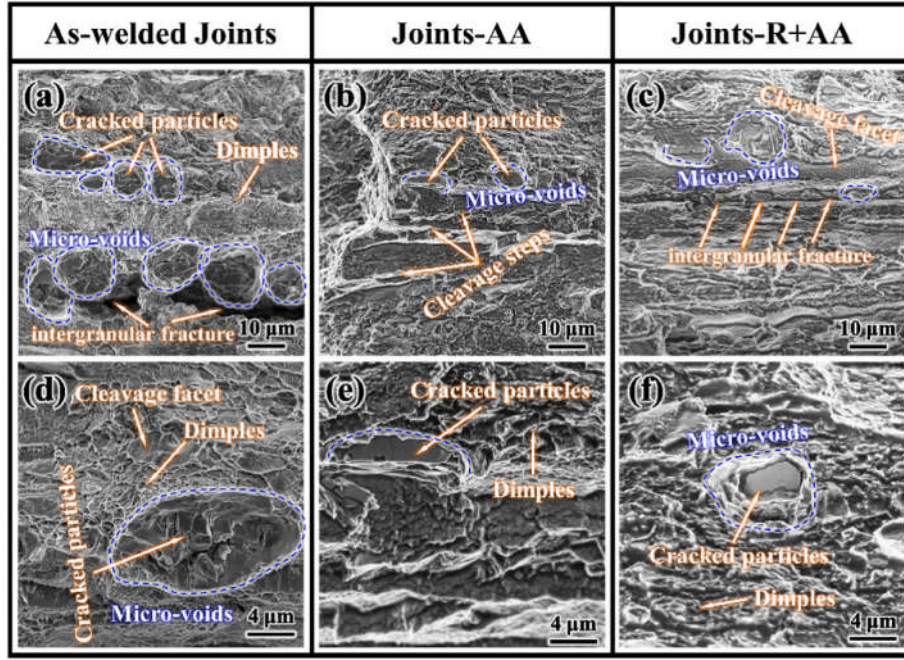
Fracture morphologies of (a, d) As-welded joints, (b, e) Joints-AA, (c, f) Joints-R + AA.
